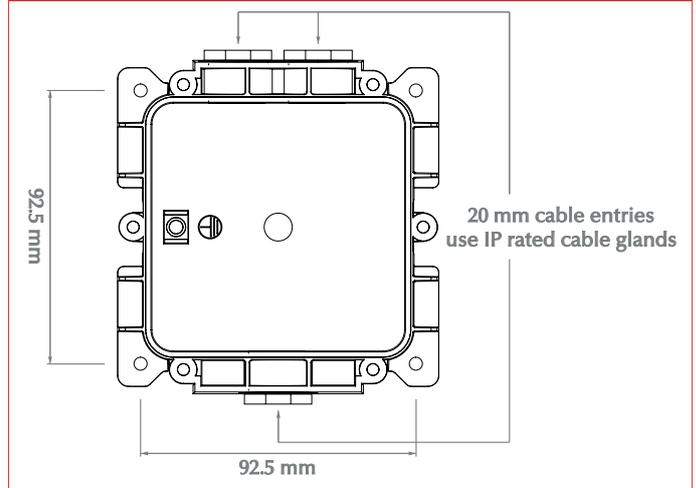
XP95® Intrinsically Safe Manual Call Point dimensional drawing
